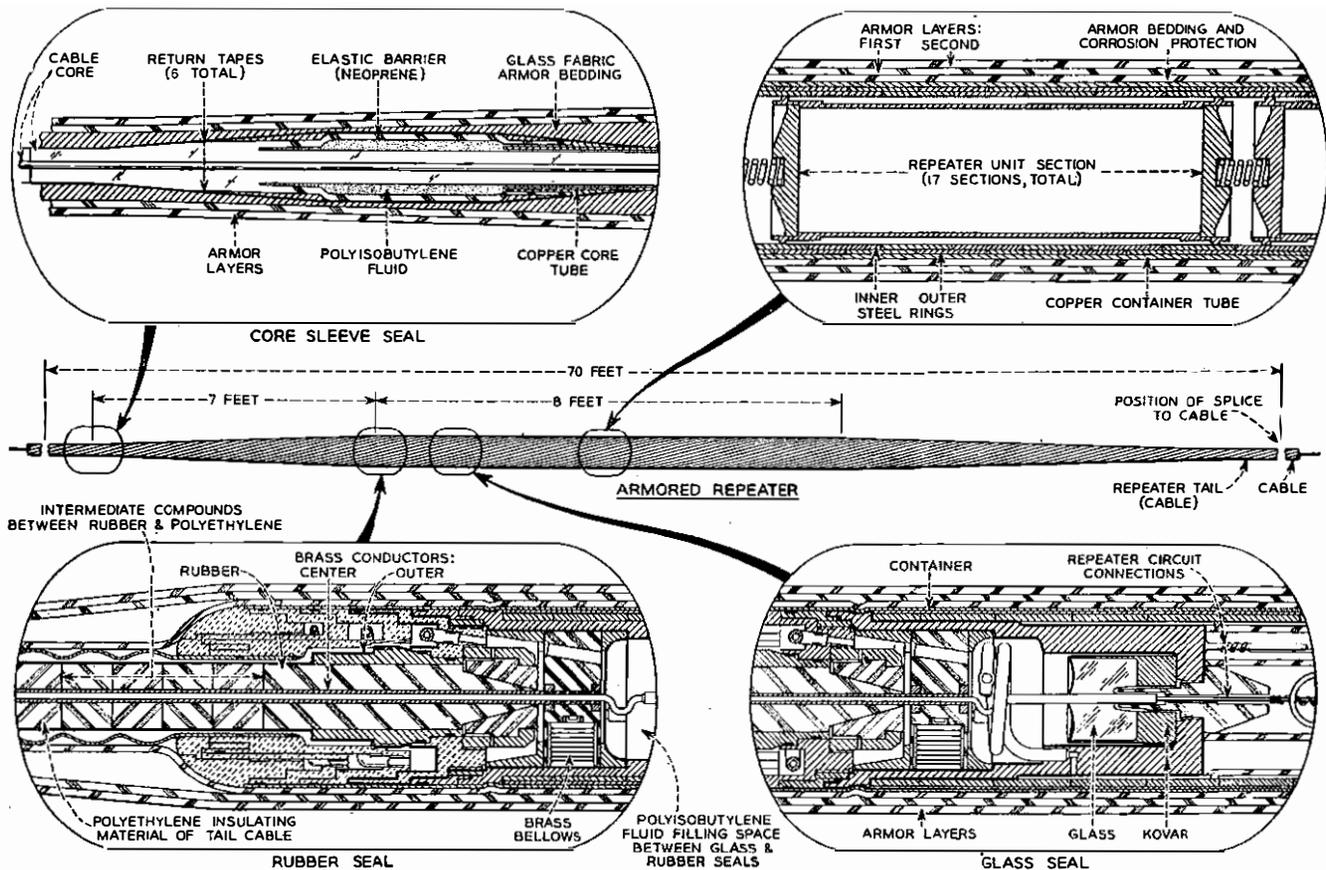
DETAILS OF CONTAINER AND SEALS.
